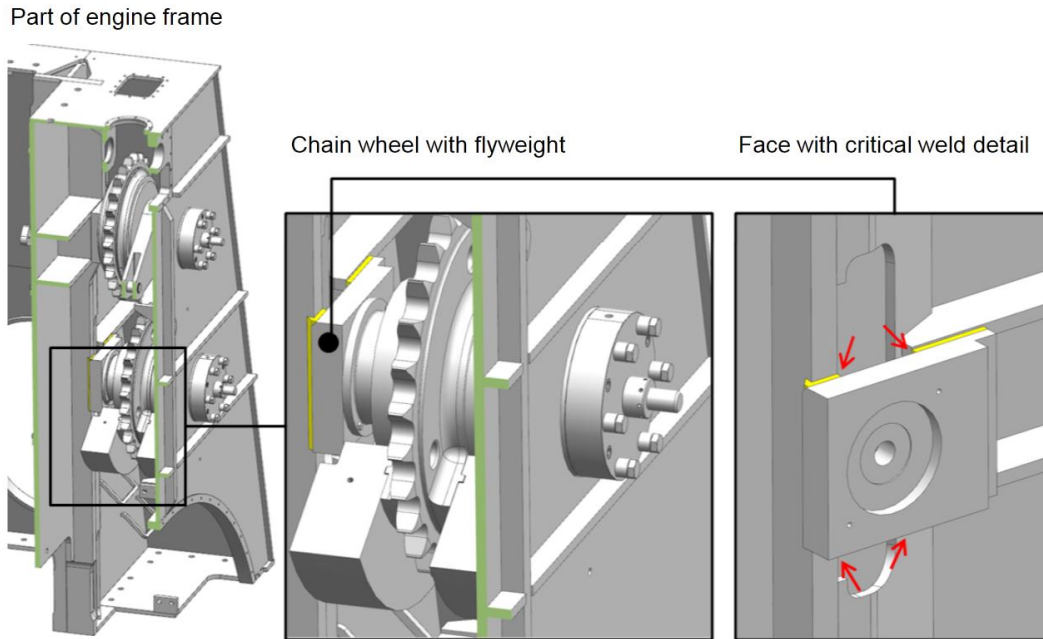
Critical weld detail illustrated on chain wheel with flyweight for the second order moment compensator.
